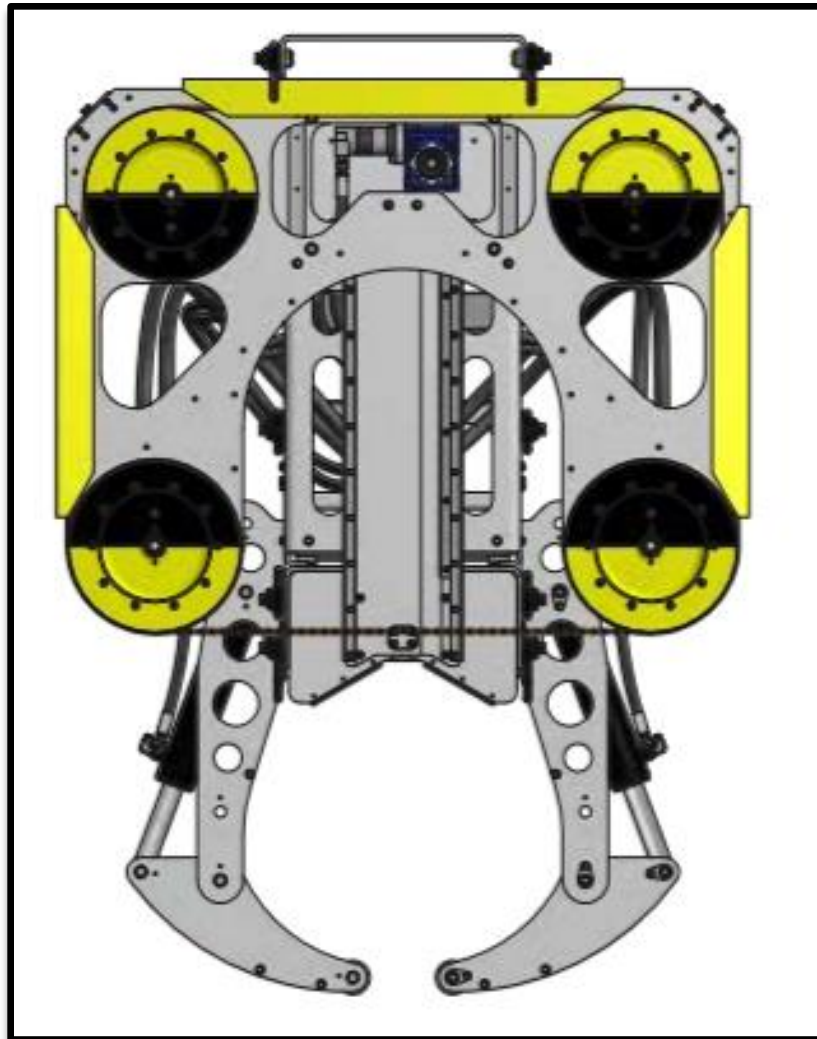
Diamond Wire Saw (DWS). Photo courtesy of MacTech Inc.
